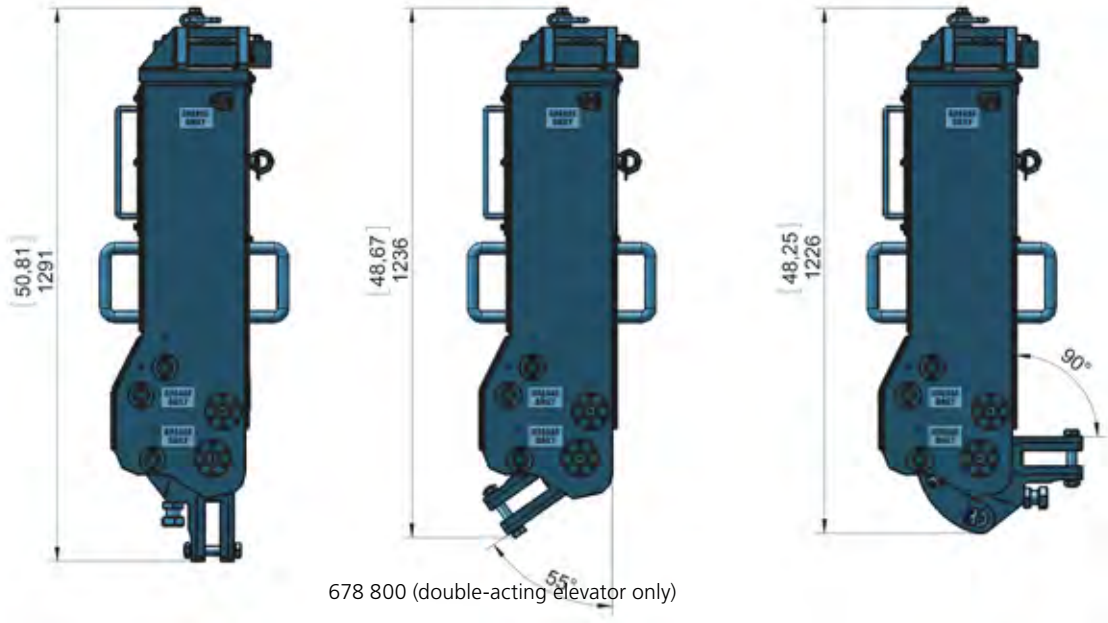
FORUM Handling Tools Single Elevator Rotator System Main Dimensions
